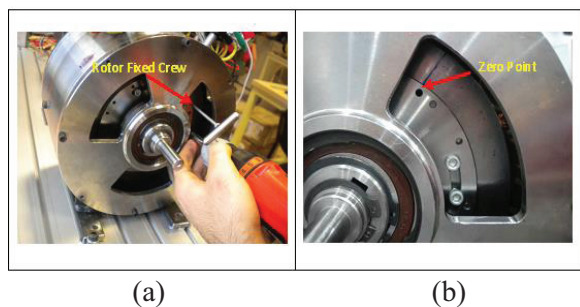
(a) Rotation of rotor for EASM motors, and (b) specially designed rotor disc.
